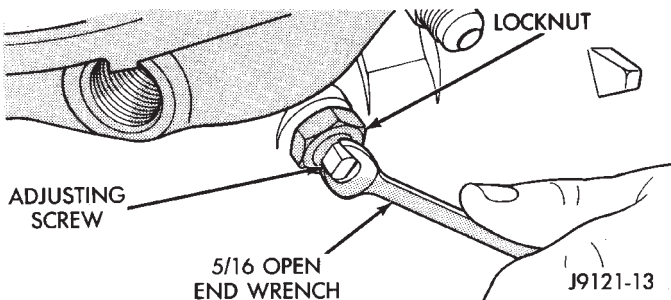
Tightening Front Band To Hold Front Clutch In Place—46RH
